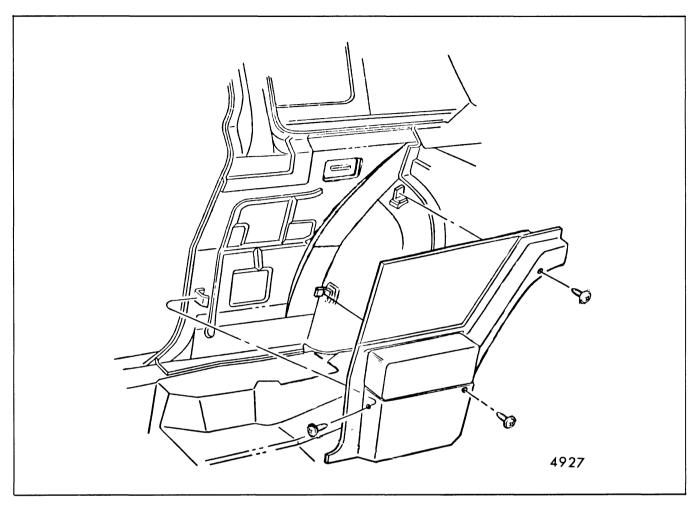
Quarter Trim Assembly Attachment - "A" Styles
